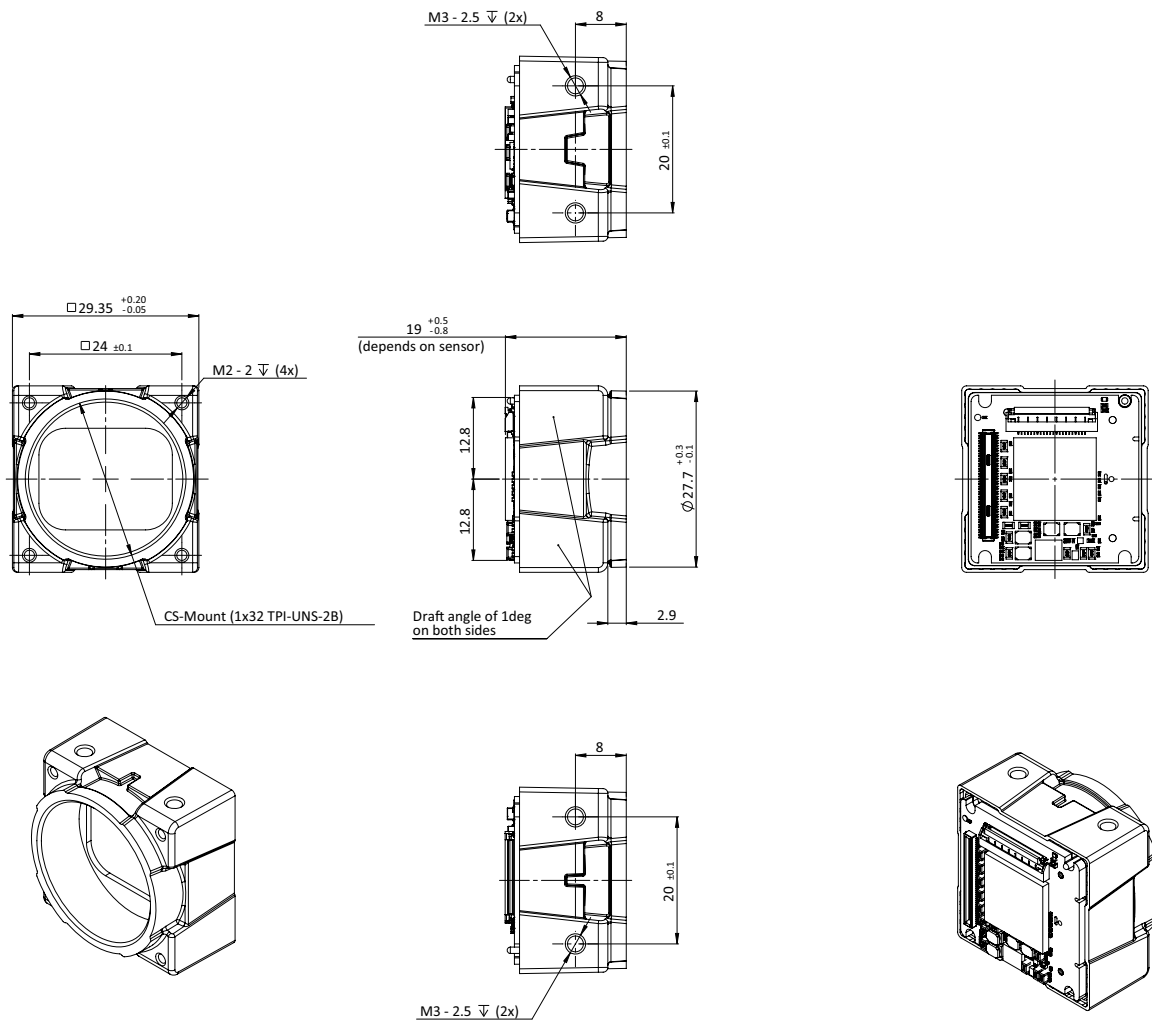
Open Housing CS-Mount (standard Alvium) dimensions
